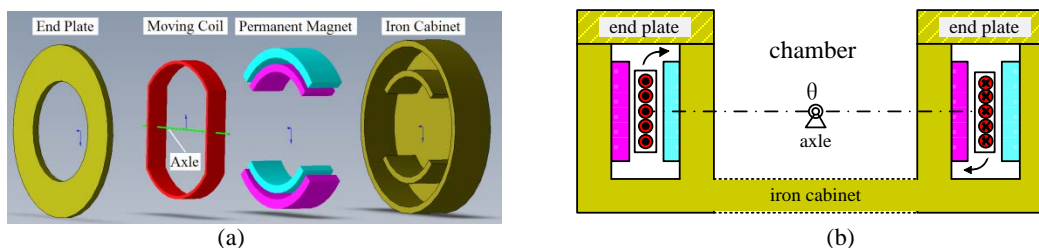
Explosive view (a) and section view (b) of the proposed LATM
